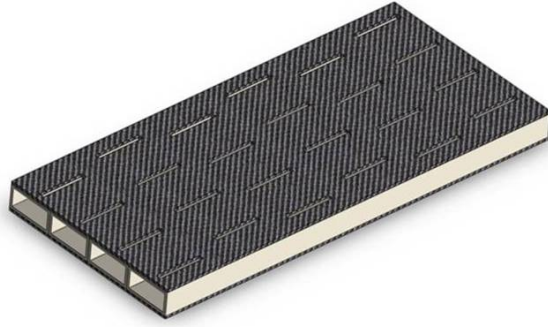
SWASS Panel Model with Longitudinal Broad Wall Slot Array
